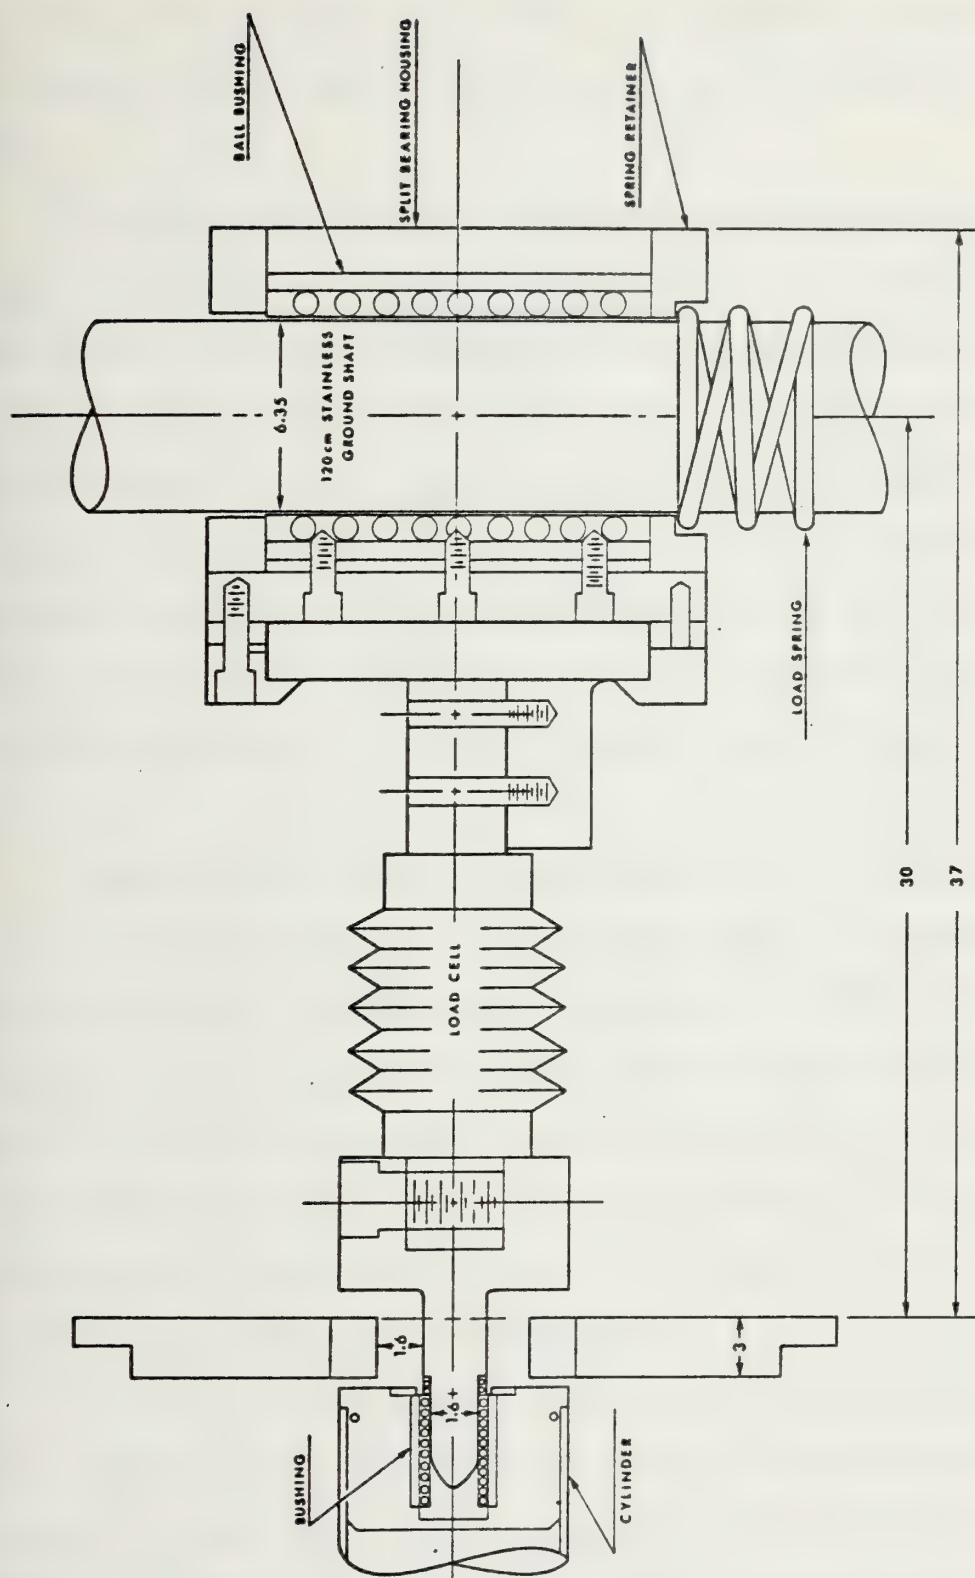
Side cutaway view of a load cell and bearing housing, (dimensions in cm)
